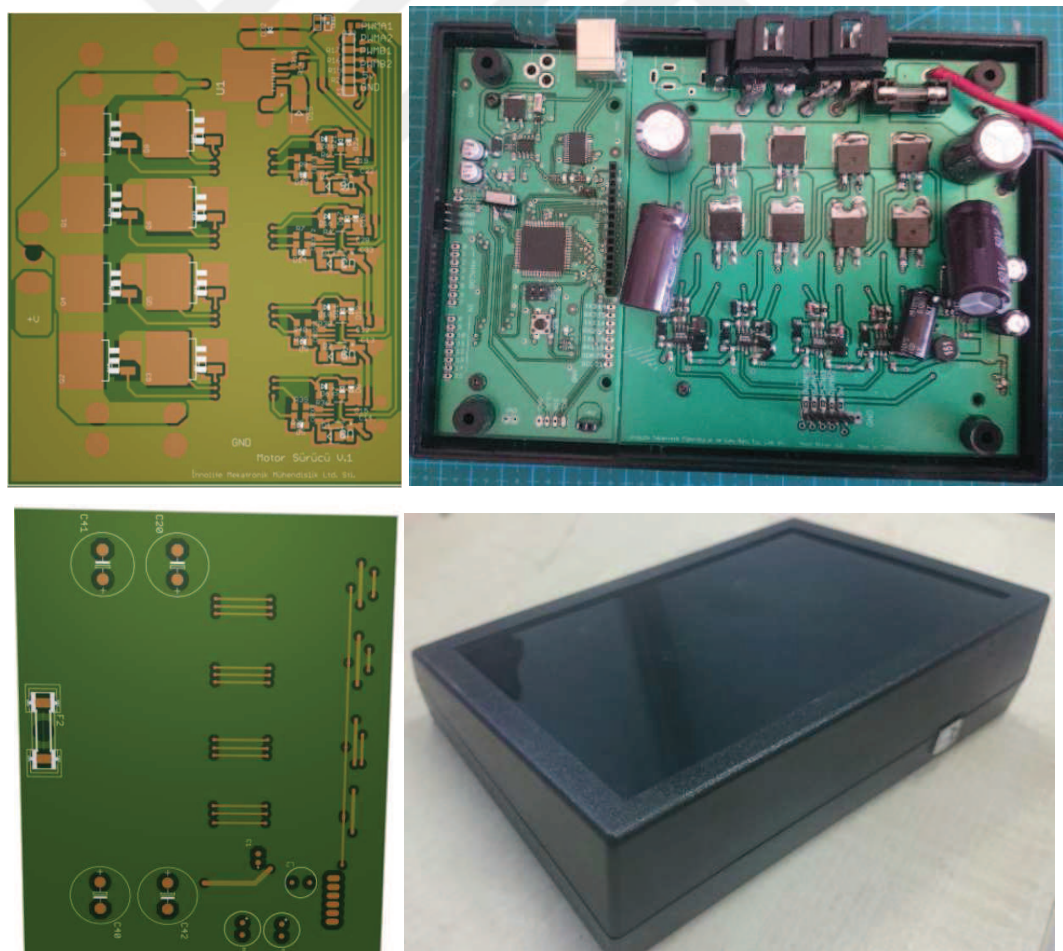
Main Control Board with double sided dual DC Motor Driver Board V2.2
